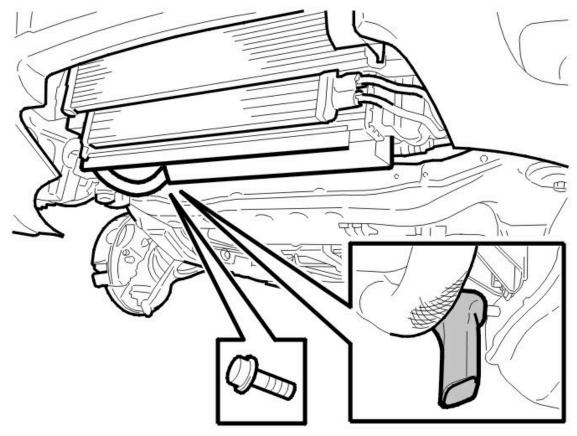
Identifying Screw For The Cable Duct. Courtesy of VOLVO CARS CORPORATION
